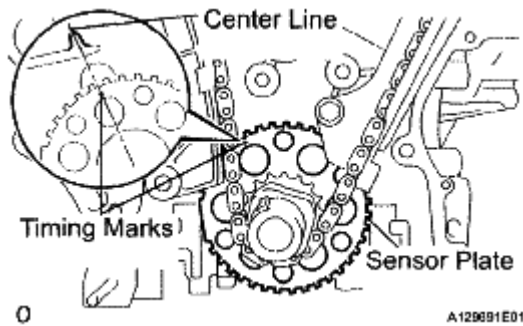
Identifying Timing Mark On Crank Angle Sensor Plate
